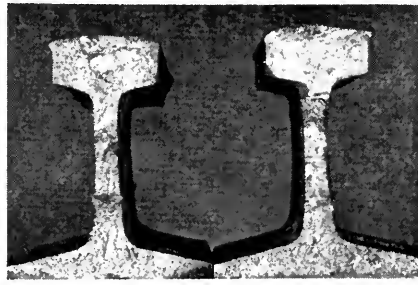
(Investigation 135-28)—Photograph showing the fractured faces at location B in Fig. 13.
